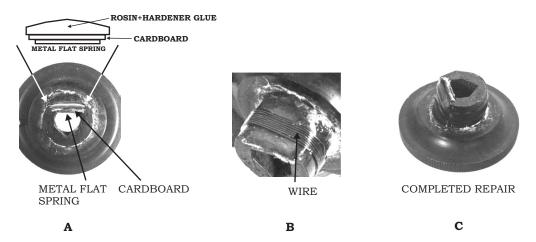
part A shows the three layers of the repair. The bottom layer is the flat metal spring that holds the knob tight to the shaft. The next layer up is a thin, cut to fit, piece of cardboard. The cardboard prevents the flat spring from being glued to the knob. The top layer is filled with a quick setting epoxy glue. The knob is placed in a small vice and positioned so that gravity holds the glue in place until it hardens.
